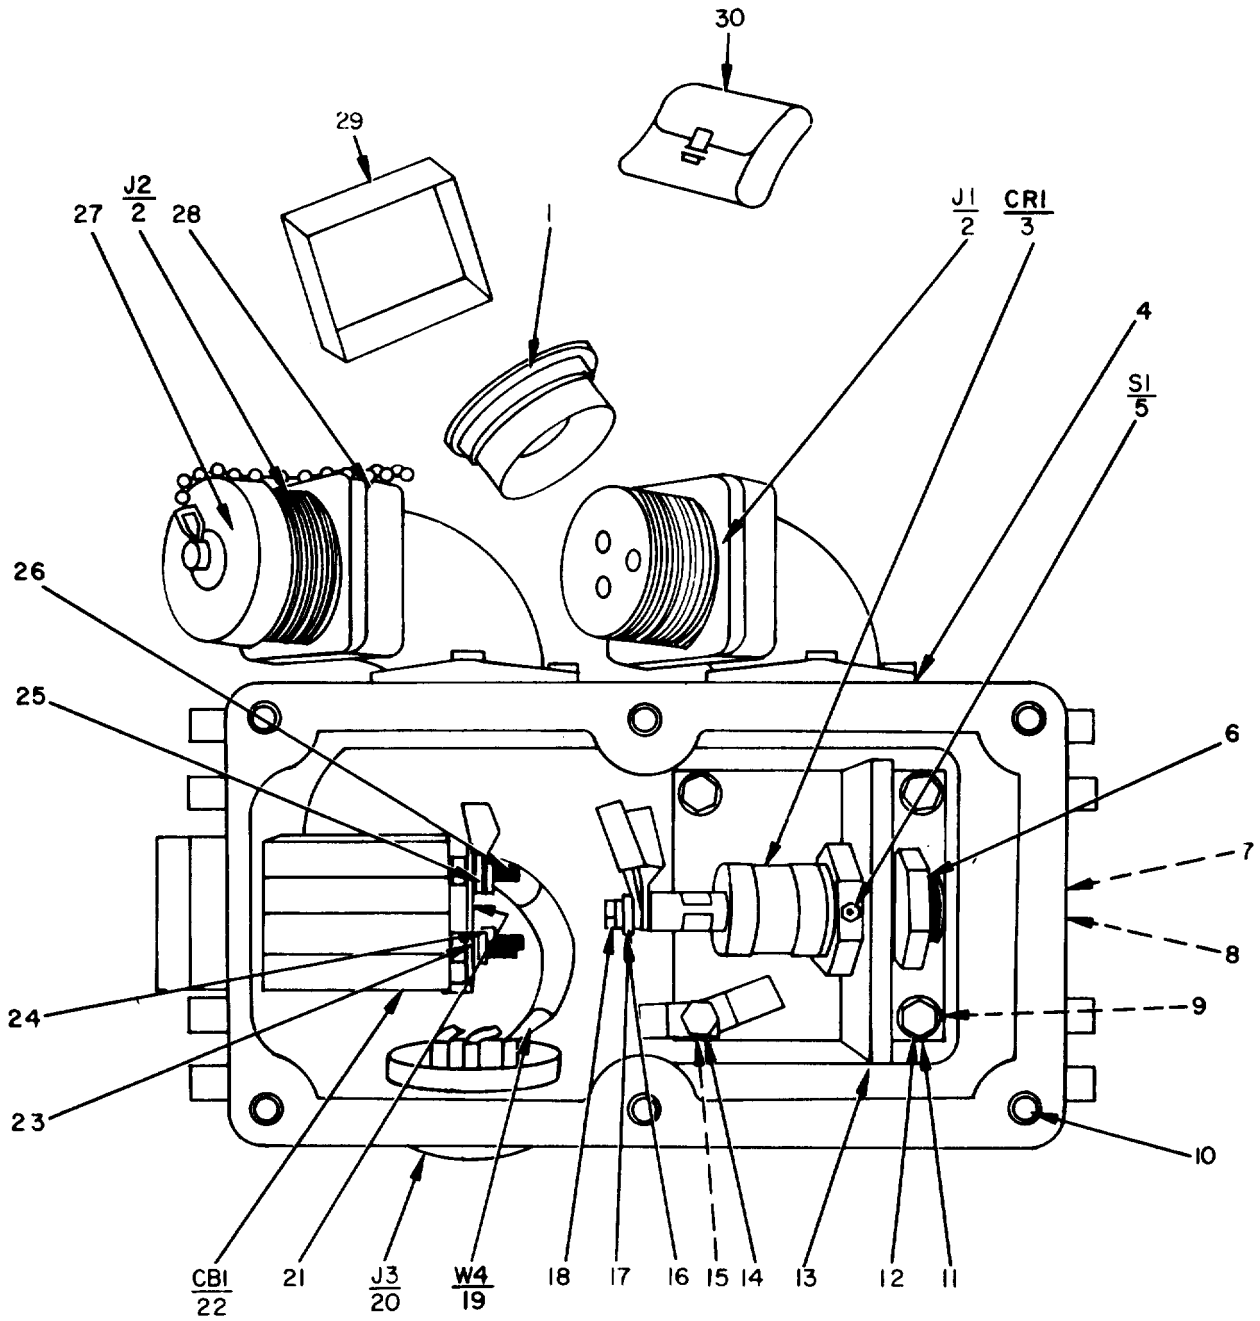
Cable Assembly, Special Purpose CX-10613/G.
